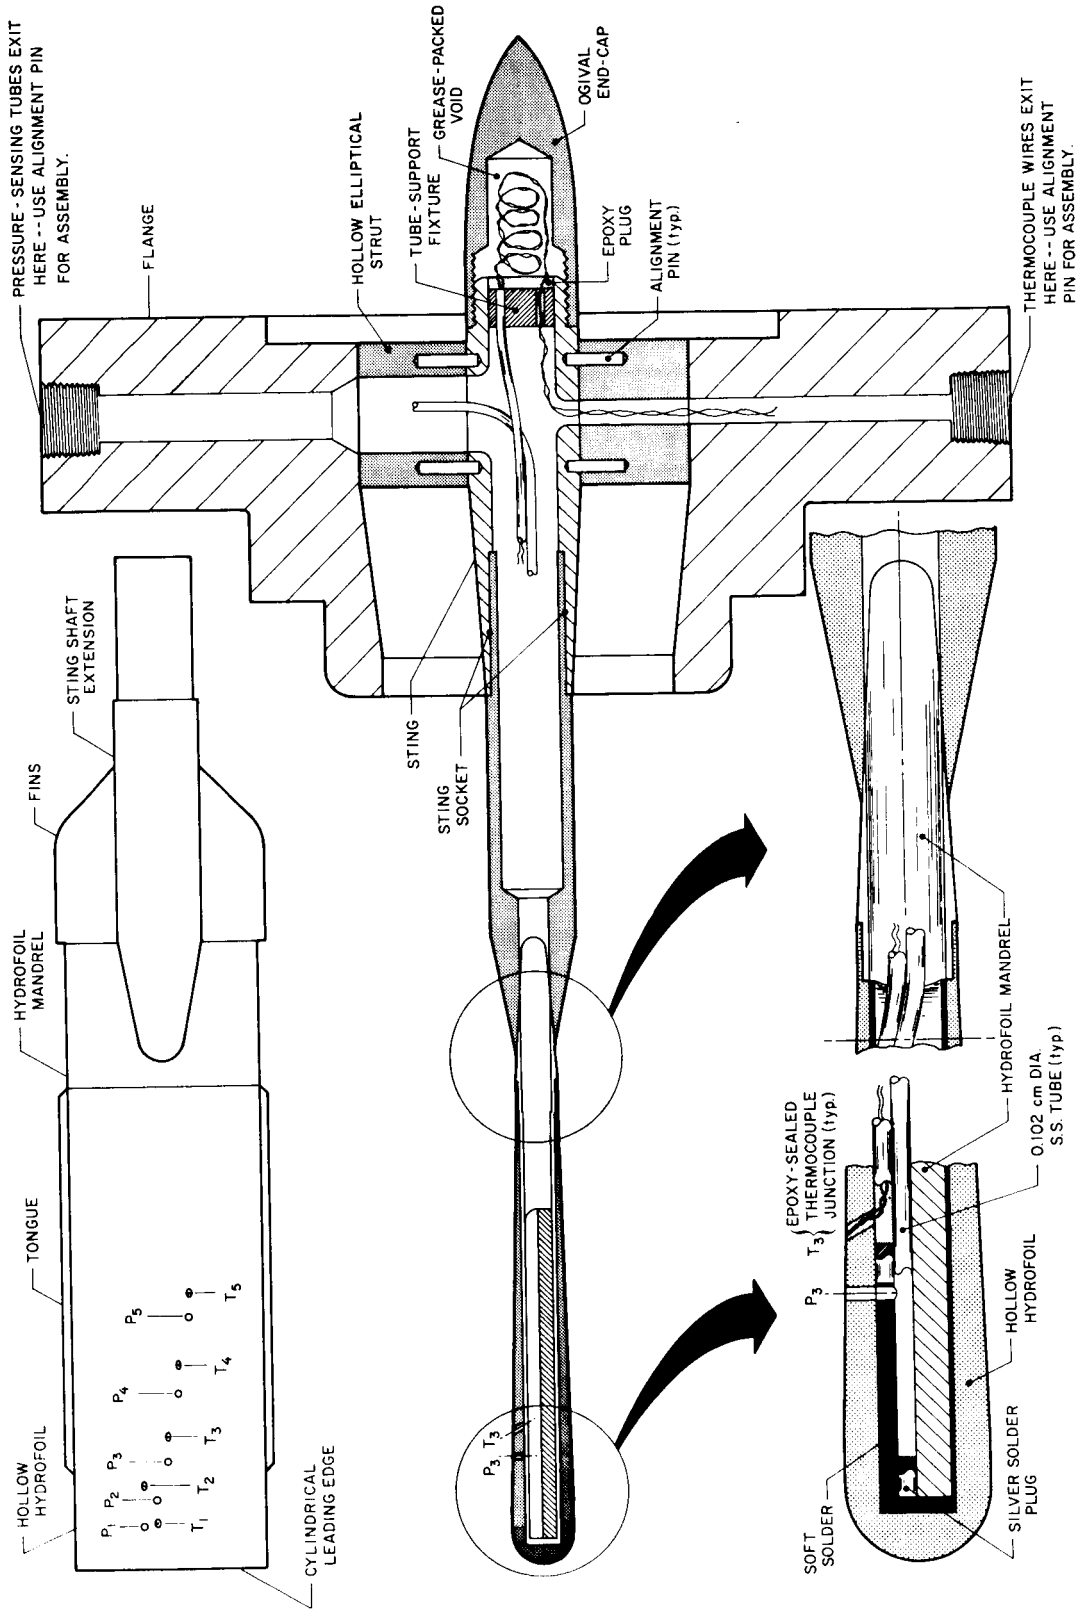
Sketch of instrumented hydrofoil and sting assembly.
